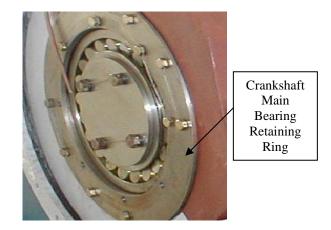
Crankshaft Main Bearing Retaining Ring
